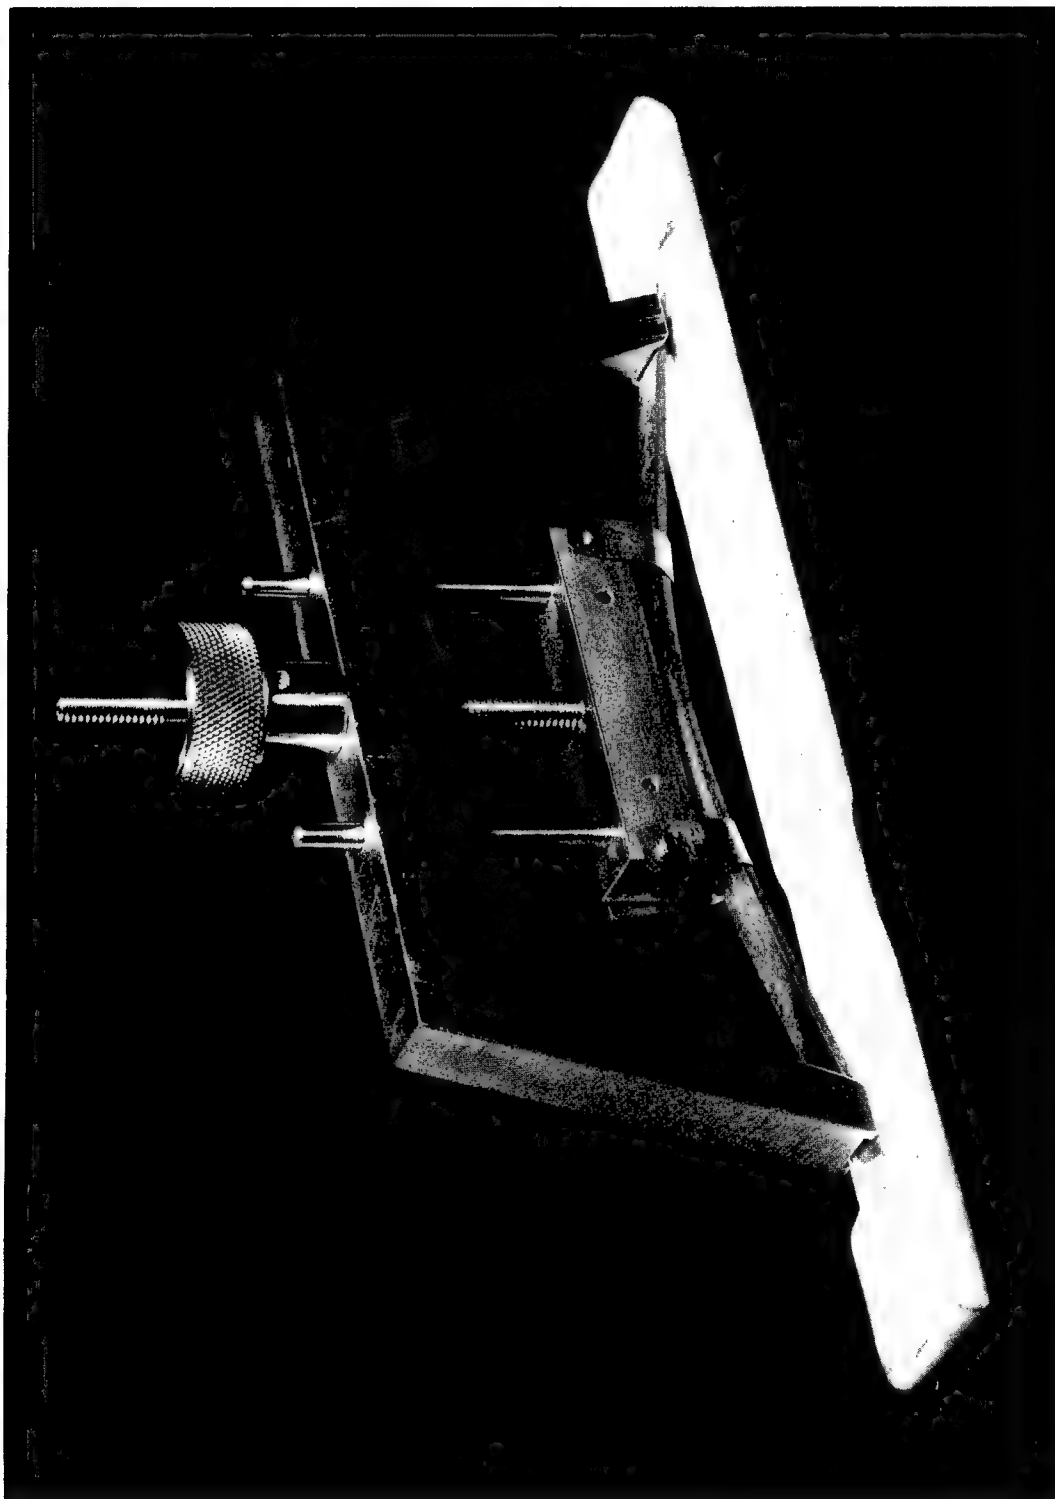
Bent-Beam Fixture, Specimen, and Mounting Device
